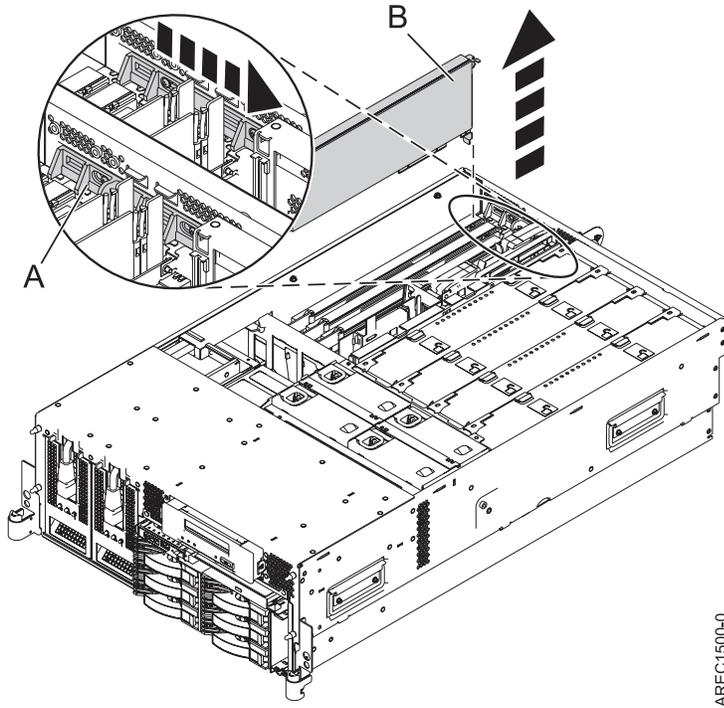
PCI adapter or filler plate removed from the rack-mounted system unit
